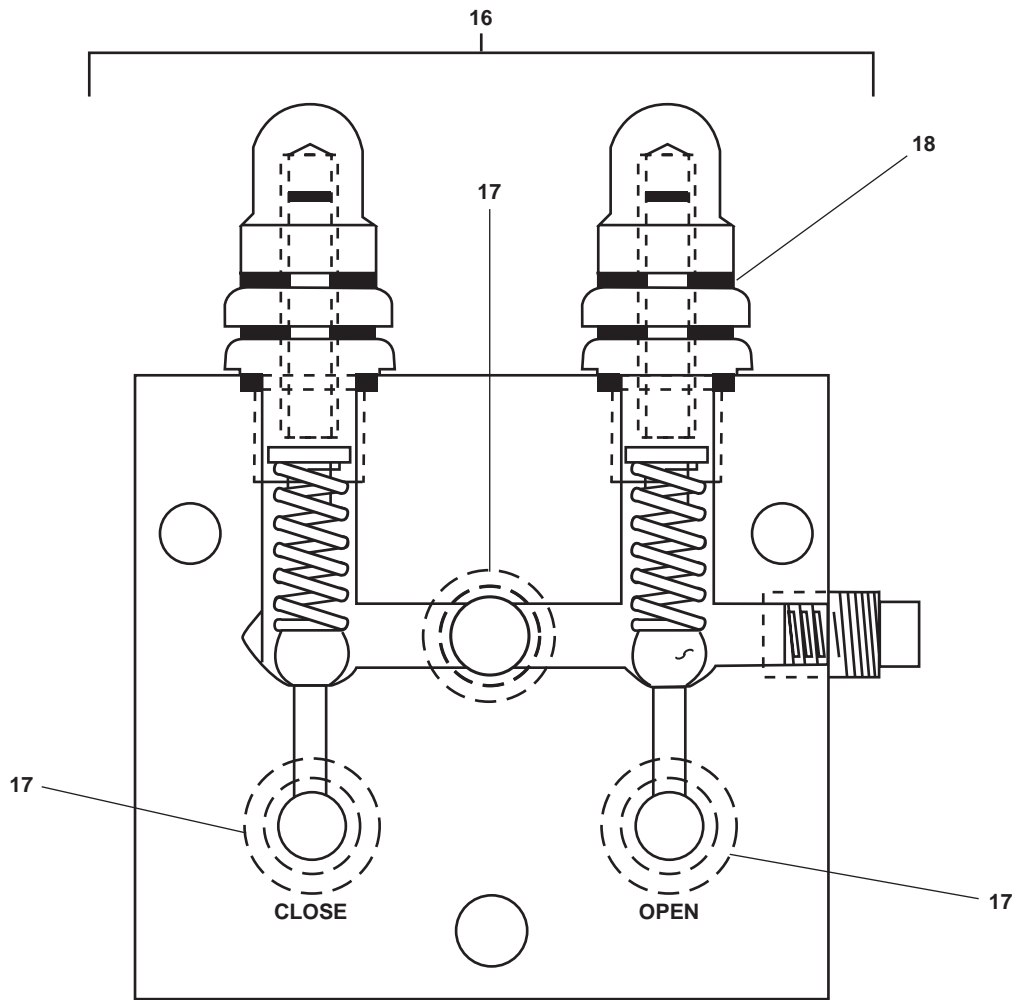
Hydraulic Watertight Doors (Sheet 4 of 9)
